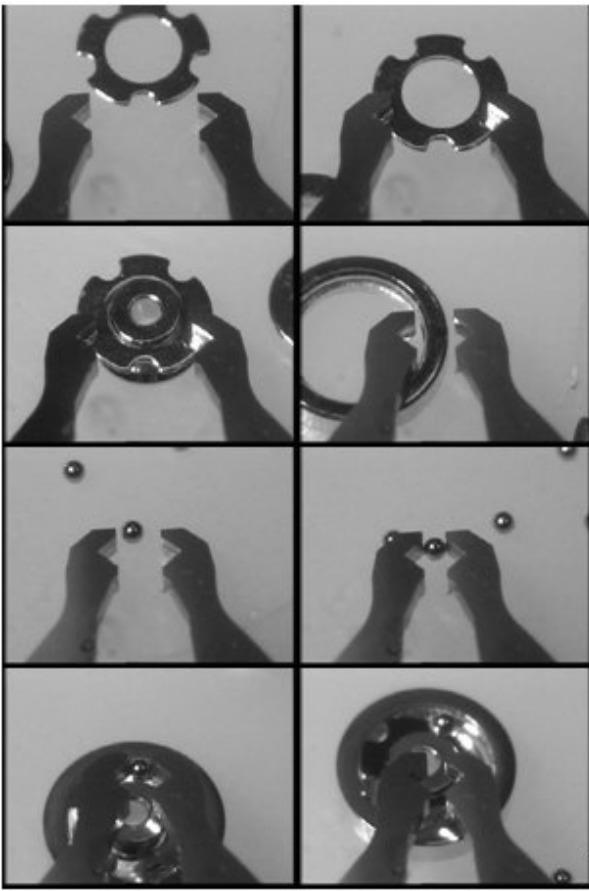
Assembly sequence of the ball bearing (from top left to bottom right) : the initial gap between the tools is of 1 mm. It enables the manipulation of the cage of the bearing. The gap between the tool is then changed using the tool changer capabilities. The new gap between the tools is of  $200\ \mu\text{m}$  allowing the manipulation of the outer ring of the bearing and the insertion of the five balls (one by one). Thus, the whole assembly of the bearing (except the final crimping) can be performed with the micro-assembly system.
